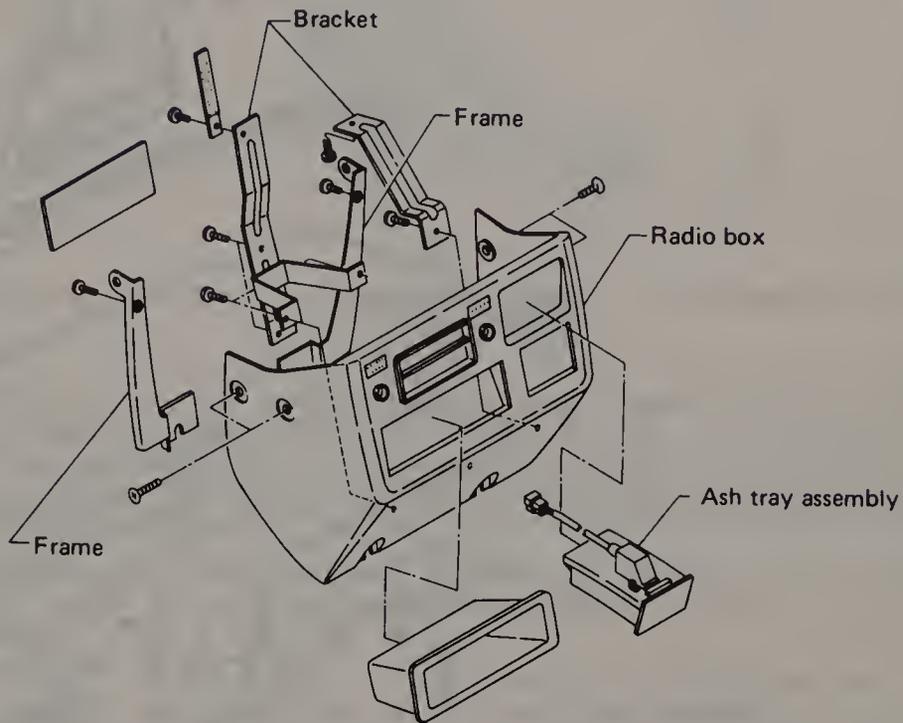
Radio console components (style A) – exploded view (Sec 30)
